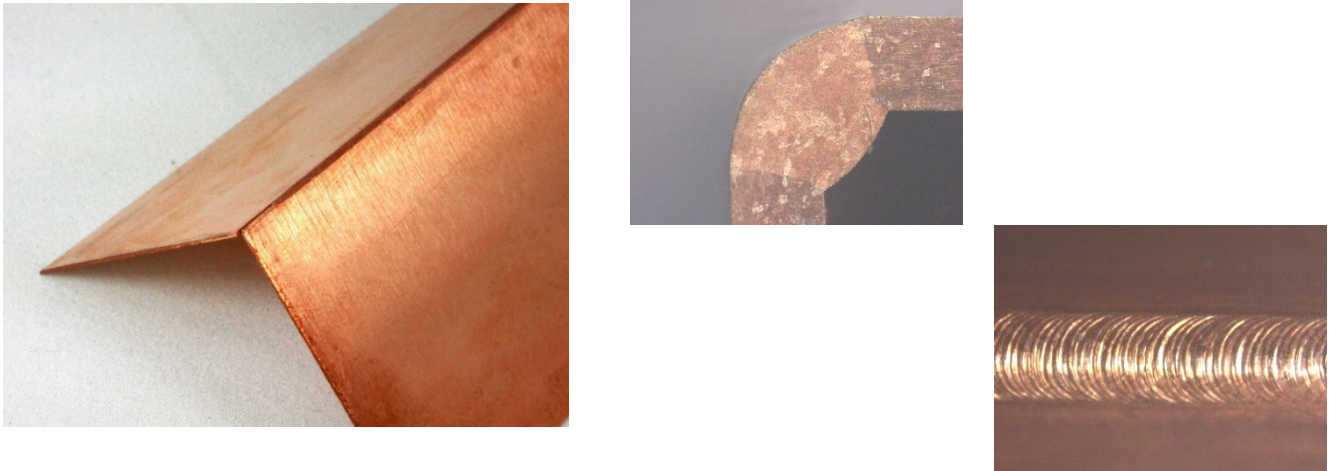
Corner weld of 0.5 mm copper sheets (left) with Laser power 1000 W, 450 nm wavelength, feeding speed 3m/min, cross-section view (top right) and close up weld bead (bottom right)
